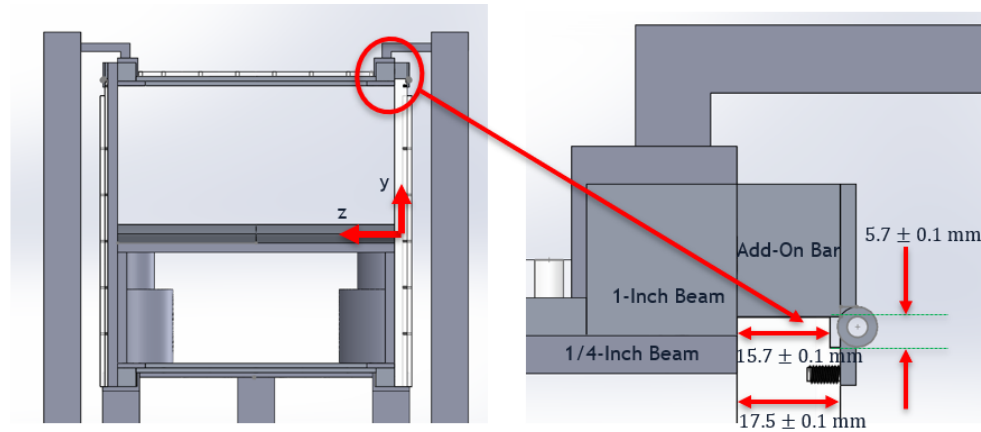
Cross Sectional View of The Hinges With Labels on Supporting Beams
